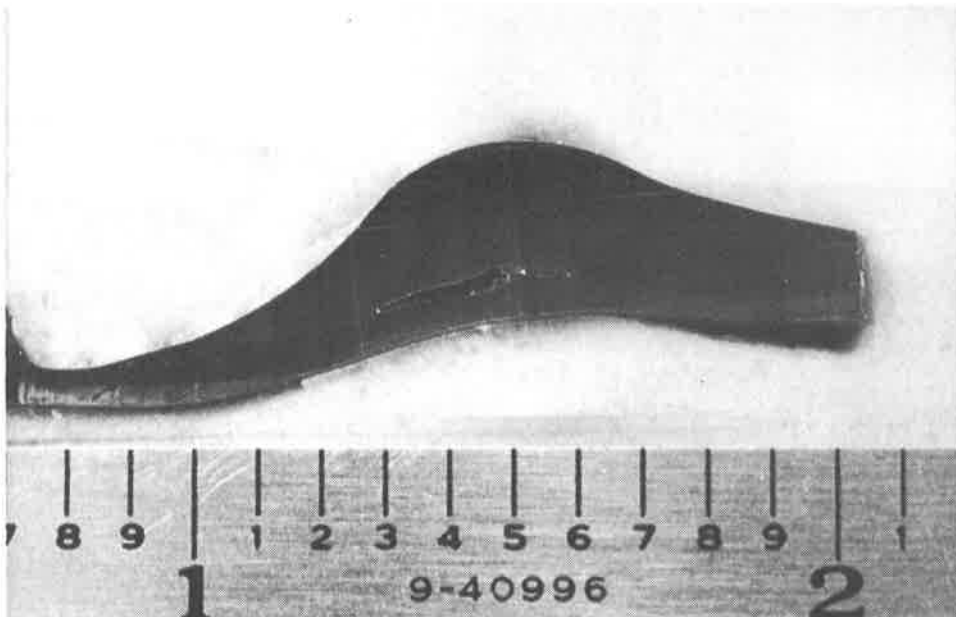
END VIEW OF CUT THROUGH THE EXTRUSION FILLET WELD PERPENDICULAR TO THE WELD AXIS
